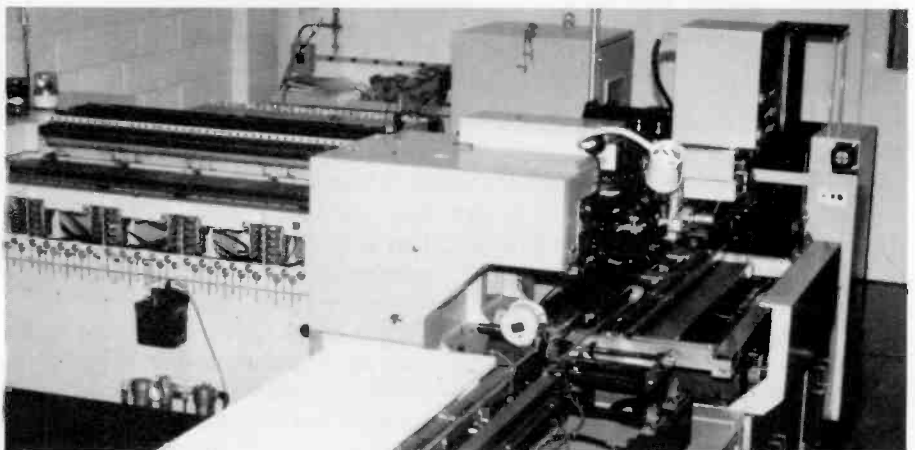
Chip-placement machine. This machine sequences chips, places the epoxy, and positions the chips on the board.
